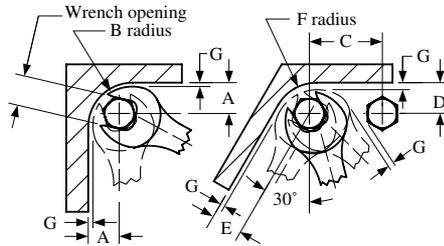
Clearances for Open End Engineers Wrench (See Table 2)
